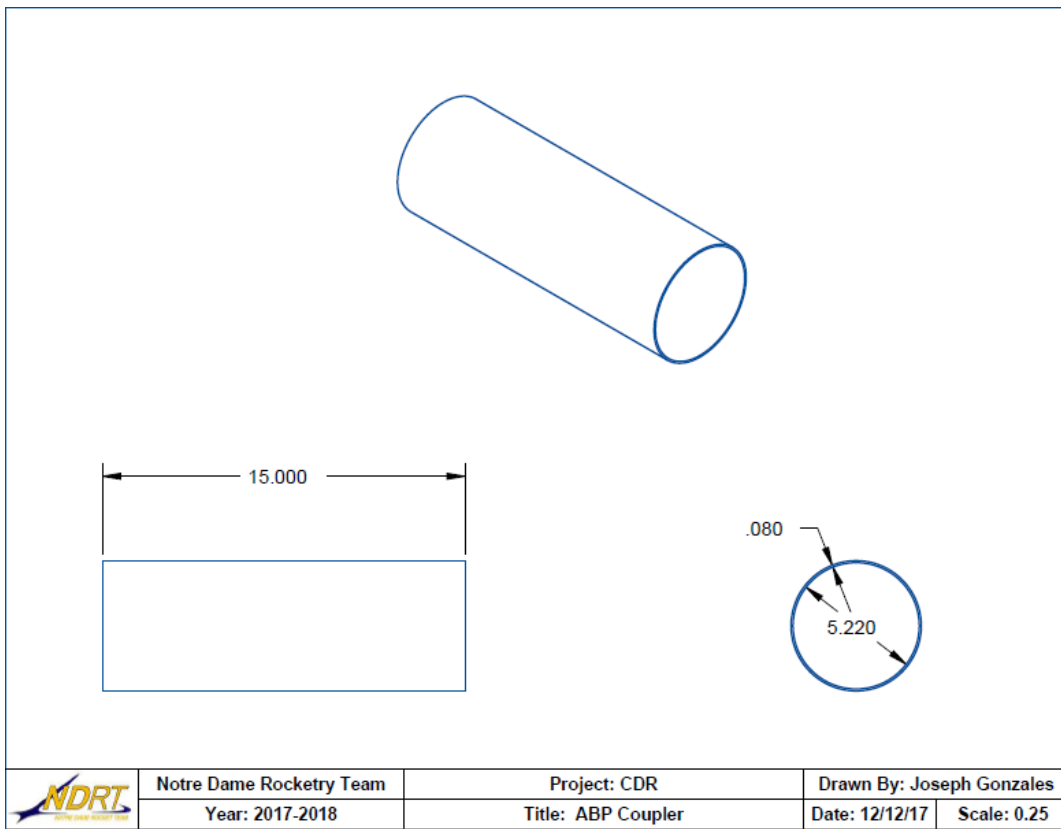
ABP Coupler Dimensions. Dimensions in inches.
